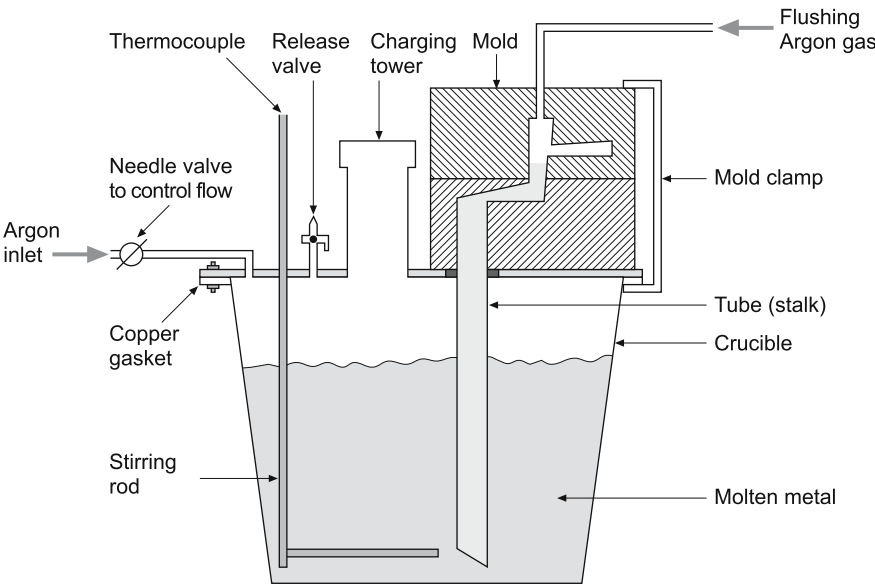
Schematic of Mg-Li base alloy melting and casting set-up [39]
